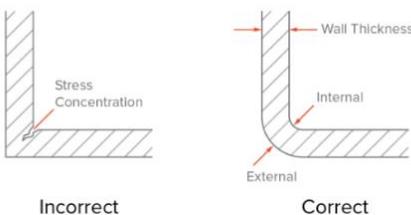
rounded and sharp corners (Hubs, n.d.)
